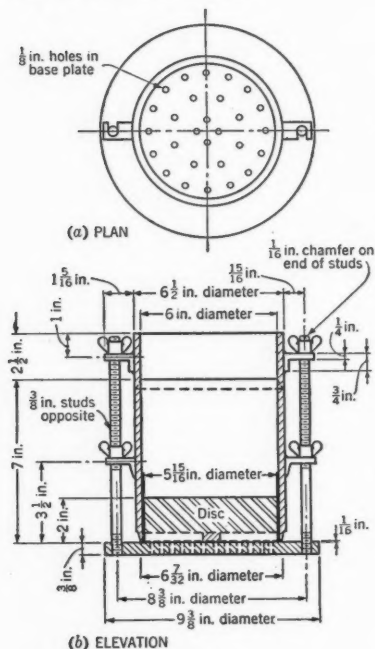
VIEW OF STEEL CYLINDER WITH COLLAR
